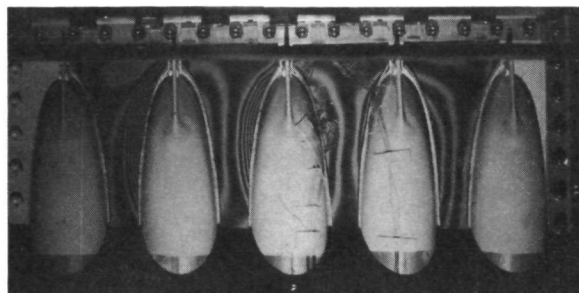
MOIRE PHOTOGRAPH OF CIRCULAR TUBE END CLOSURE AFTER SHEAR LOAD INDUCED BOND FAILURE
